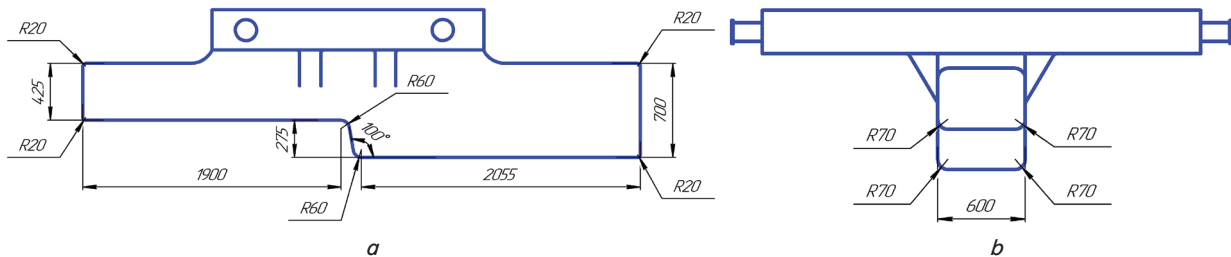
Draft of the stepped die: front view (*a*); side view (*b*)
